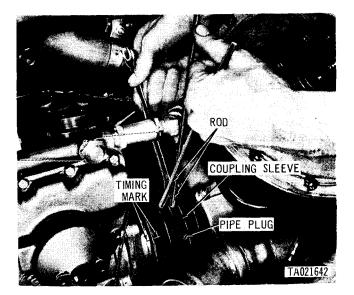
Removing fuel injection pump drive gear train backlash.
